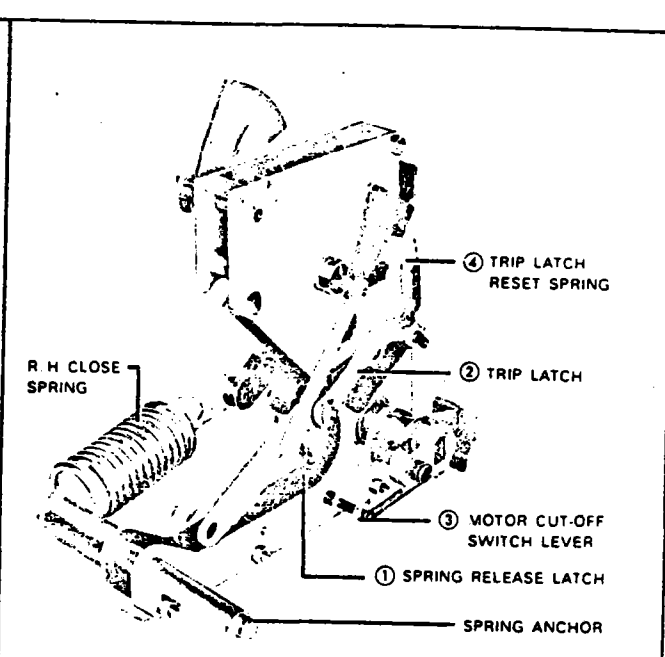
Rear View of Power-Operated Mechanism (Left Close Spring Removed)
